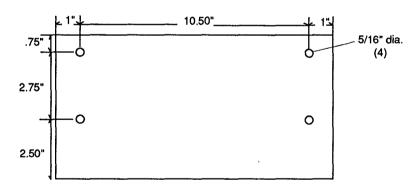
2-Torch Operator's Panel - Mounting Dimensions
